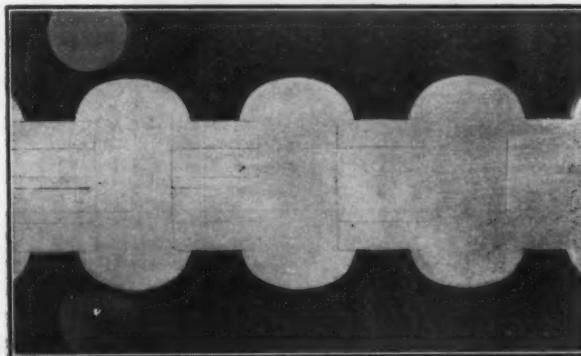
A Section Through Rivets Driven with the Oerlikon Electro-Hydraulic Riveter.
